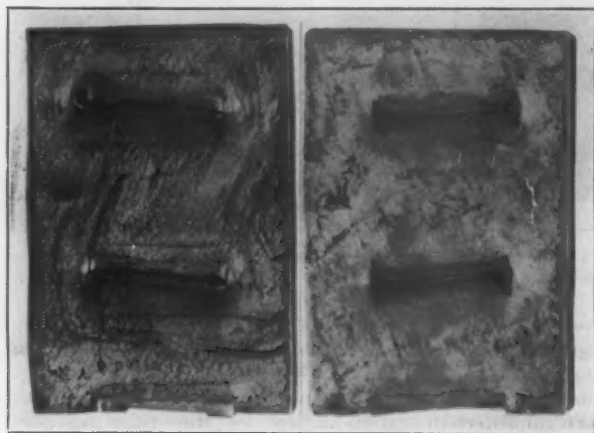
The Outside and Inside of a Section of Well Casing with the Ordinary Cracked Perforations.
